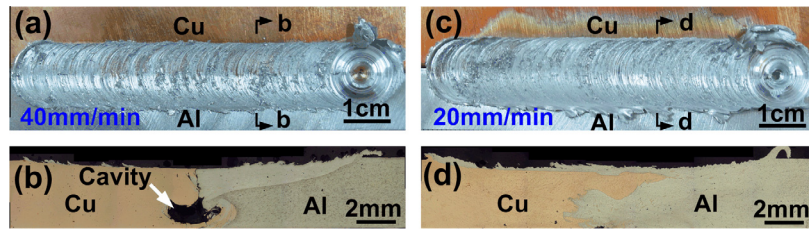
Weld appearances and cross sections of friction stir welded joints at different traverse speeds: (a, b) 40 mm/min, (c, d) 20 mm/min.
